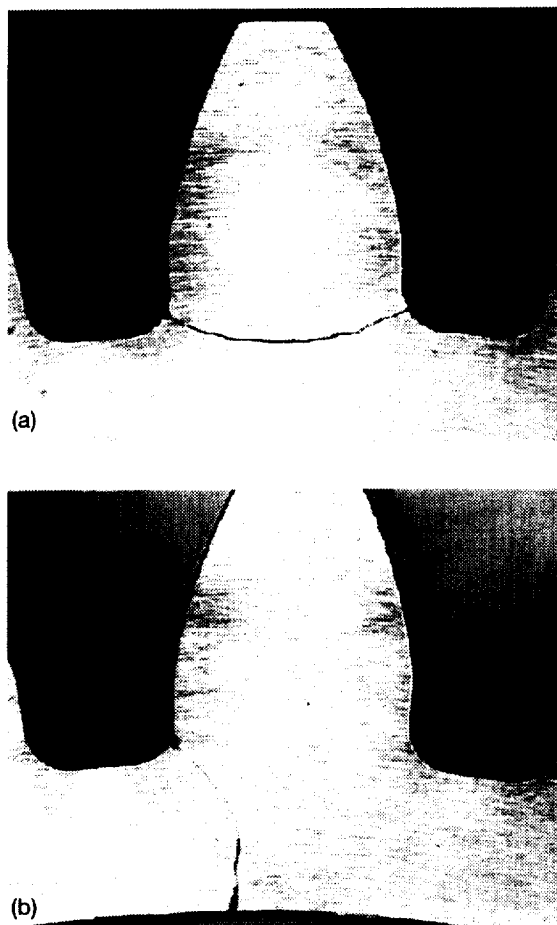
Experimentally determined crack propagation paths. (a) Thick-rimmed tooth produced tooth fracture. (b) Thin-rimmed tooth produced rim fracture.
